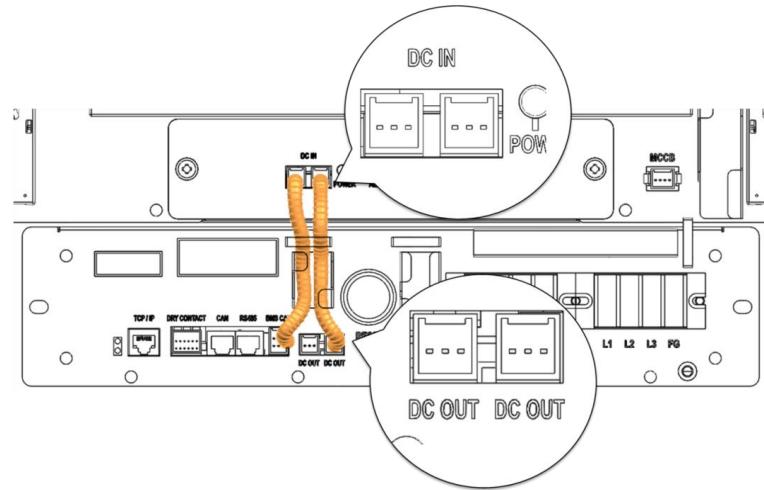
DC Power Cables from SMPS Assembly Type A to SMU
